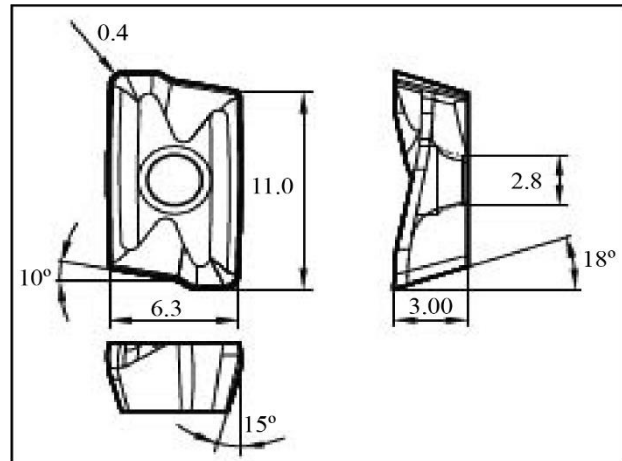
Geometrical elements of insert BDMT 110308ER-JT
